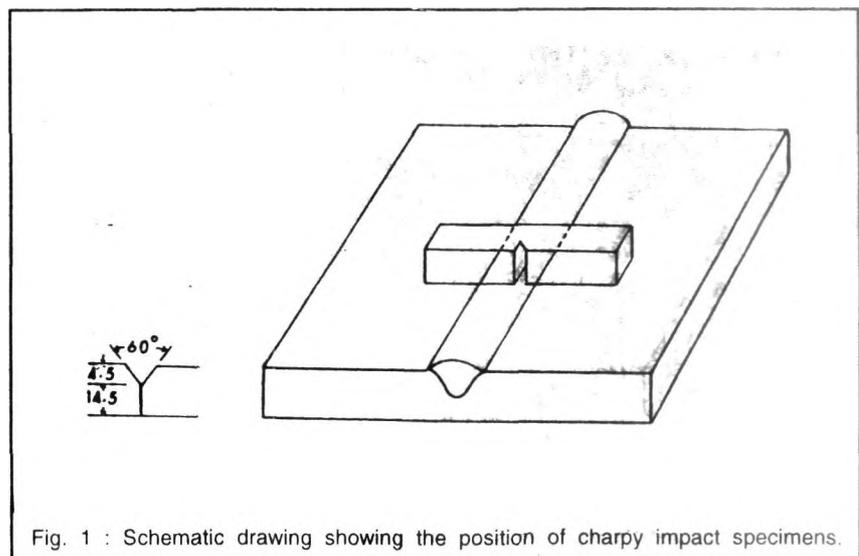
Schematic drawing showing the position of Charpy impact specimens.
